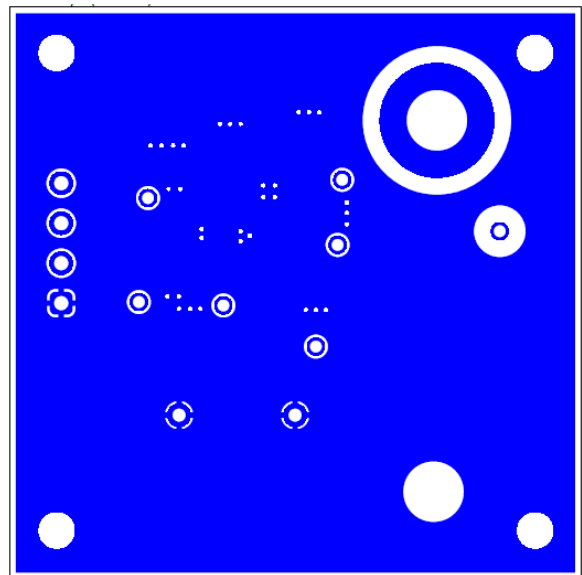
FAD1110EVB PCB Internal Plane 2 Drawing
